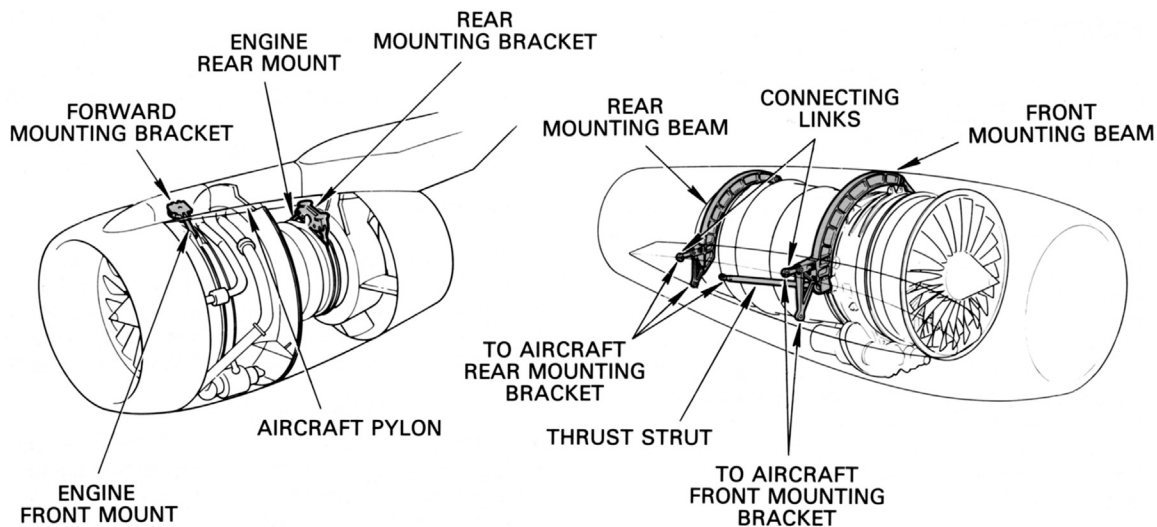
Typical turbo-jet engine mountings. (Source: Rolls Royce.)
